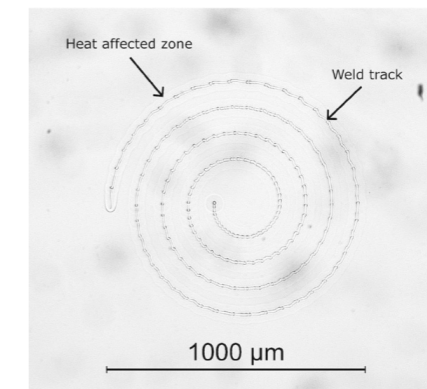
Ultrashort Pulse Laser Weld | Source: van Abeelen et al., 2025
